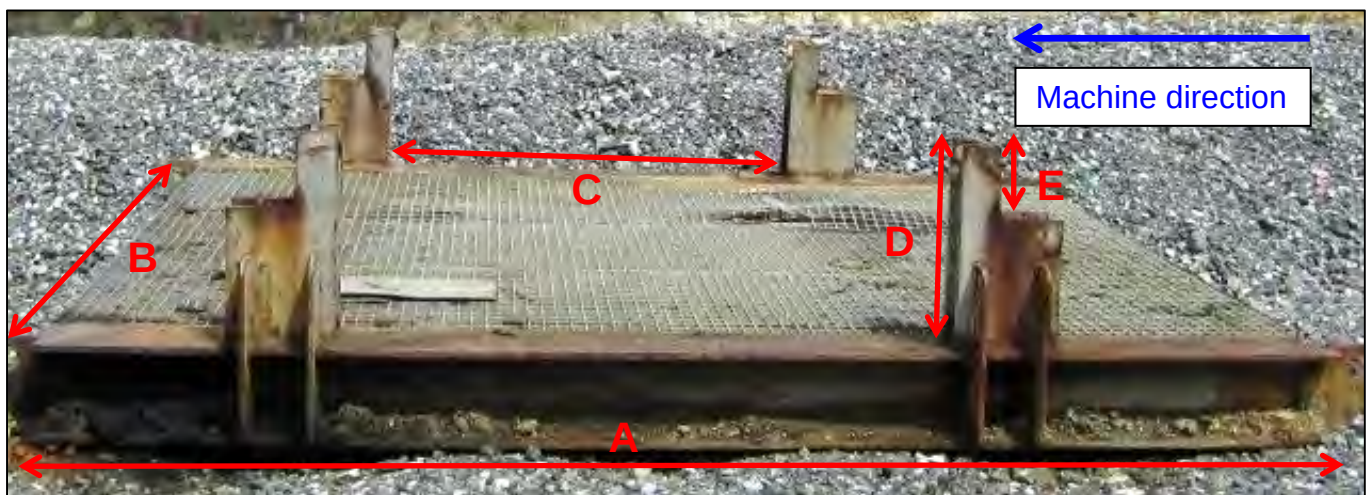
HMS bucket repair jig with example dimensions: A = 440 cm, B = 395 cm, C = 210 cm, D = 72 cm, E = 25 cm.
